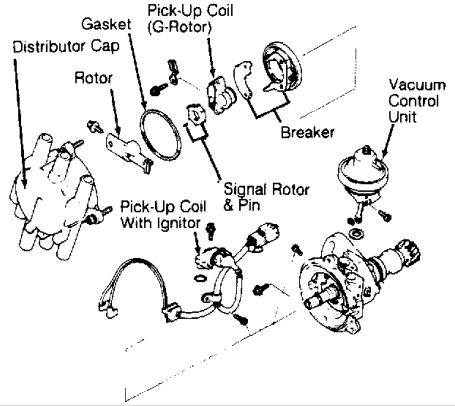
Exploded View of Distributor (B2200 Carbureted) Courtesy of Mazda Motors Corp.
